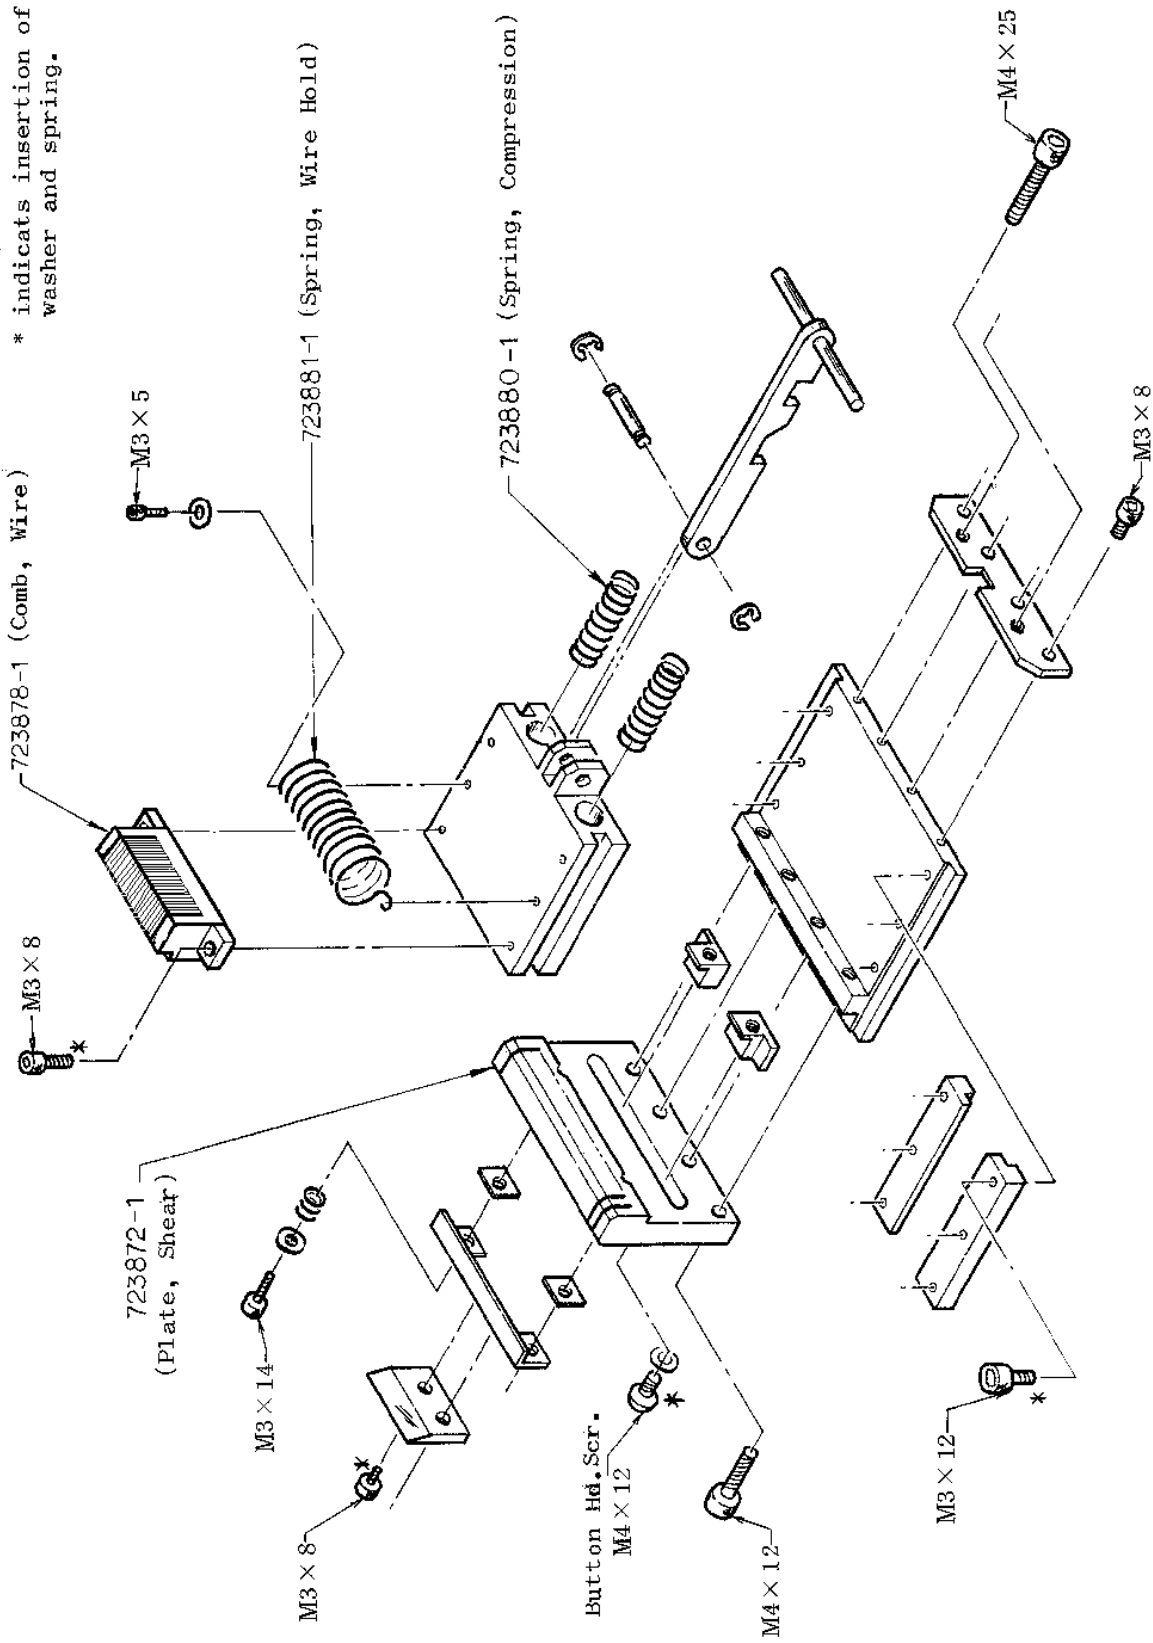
Tool Assembly for Discrete Wire Application ( 723860-3 )
